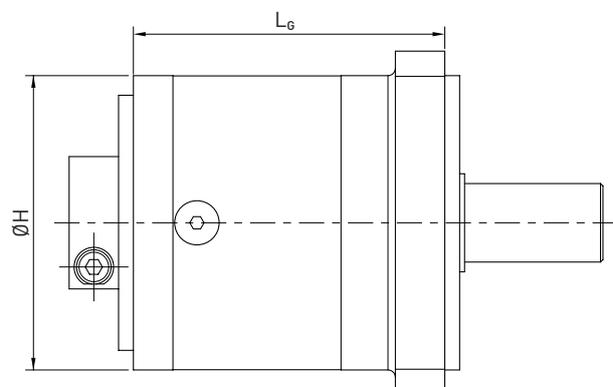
Dimensional drawing of gearbox for linear modules HM-B, linear tables HT-B, cantilever axes HC-B and double axes HD
